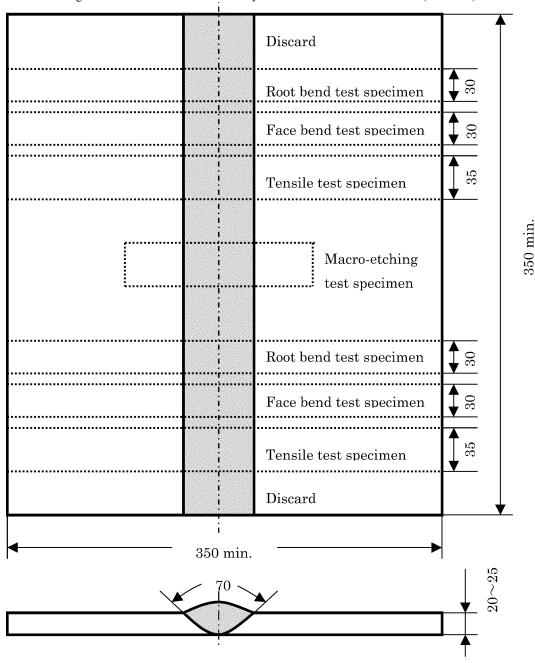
Butt Weld Test Assembly with a Thickness of 20 to 25 mm (Unit: mm)
